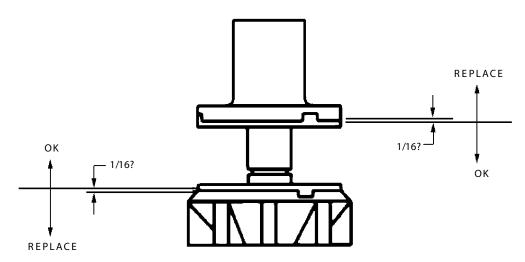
UPPER BEARING AND AUGER ASSEMBLY
